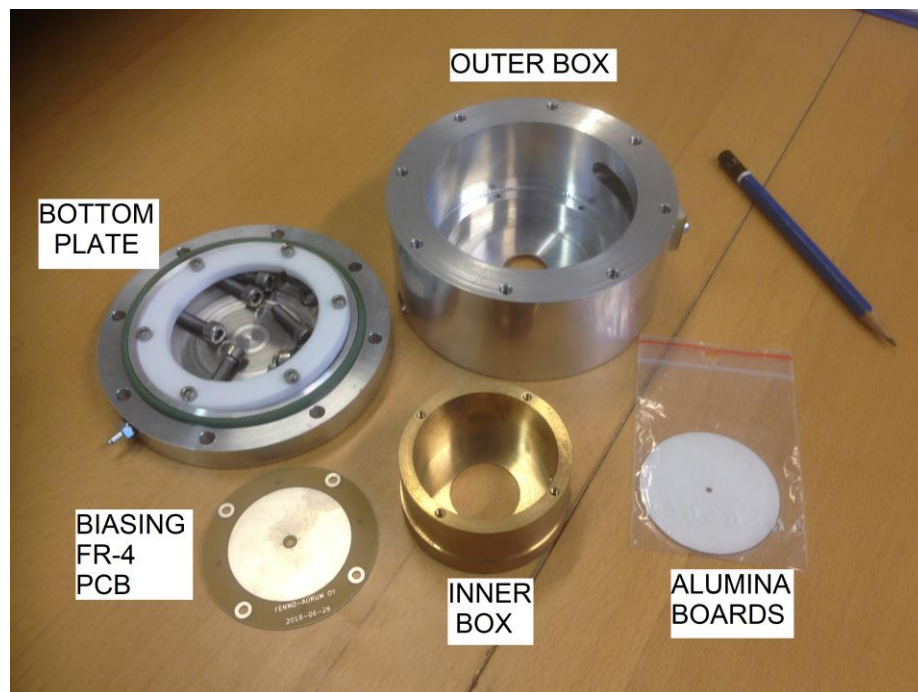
Manufactured mechanical parts of Gas Drift Detector.
